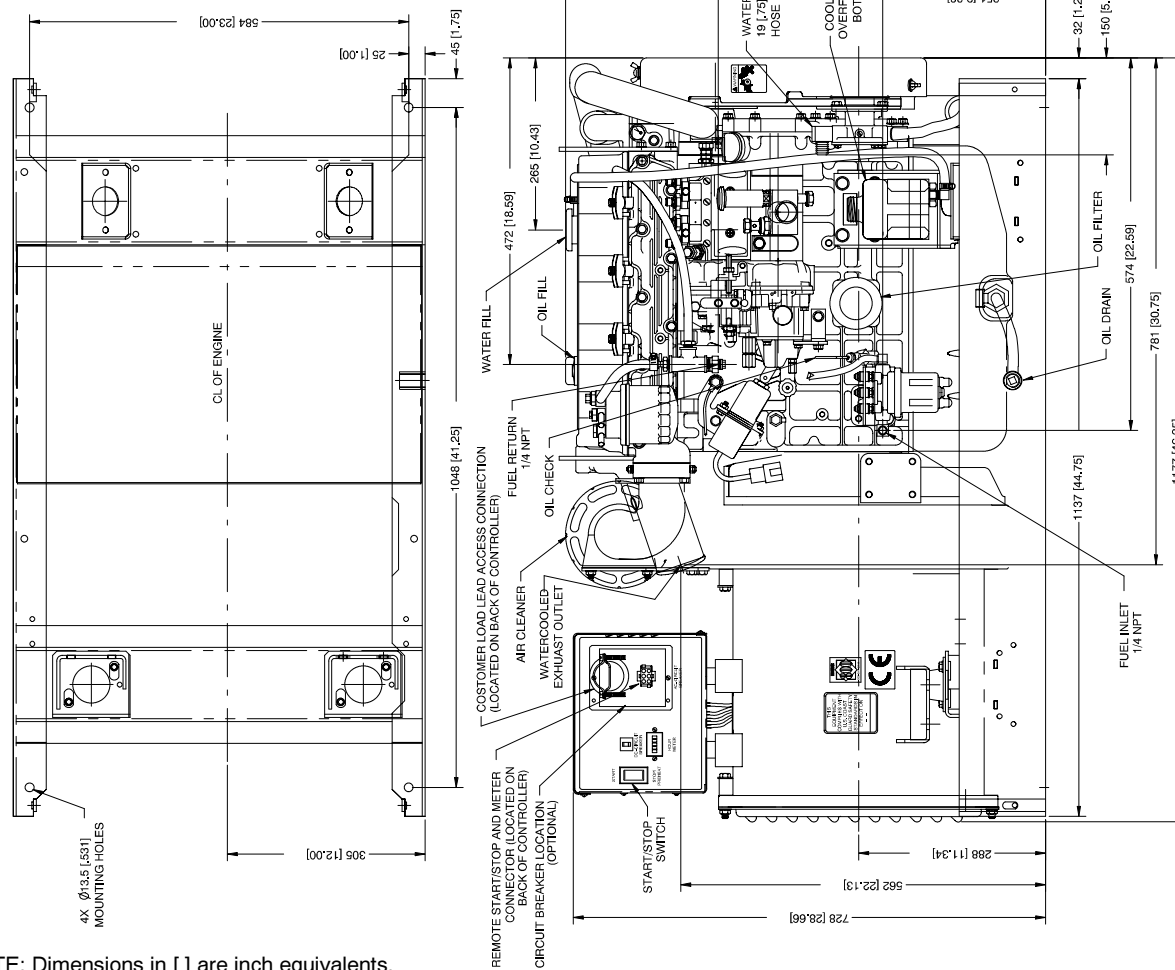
Dimension Drawing, 19/20EFOZ and 23/24EOZ with Sound Shield
